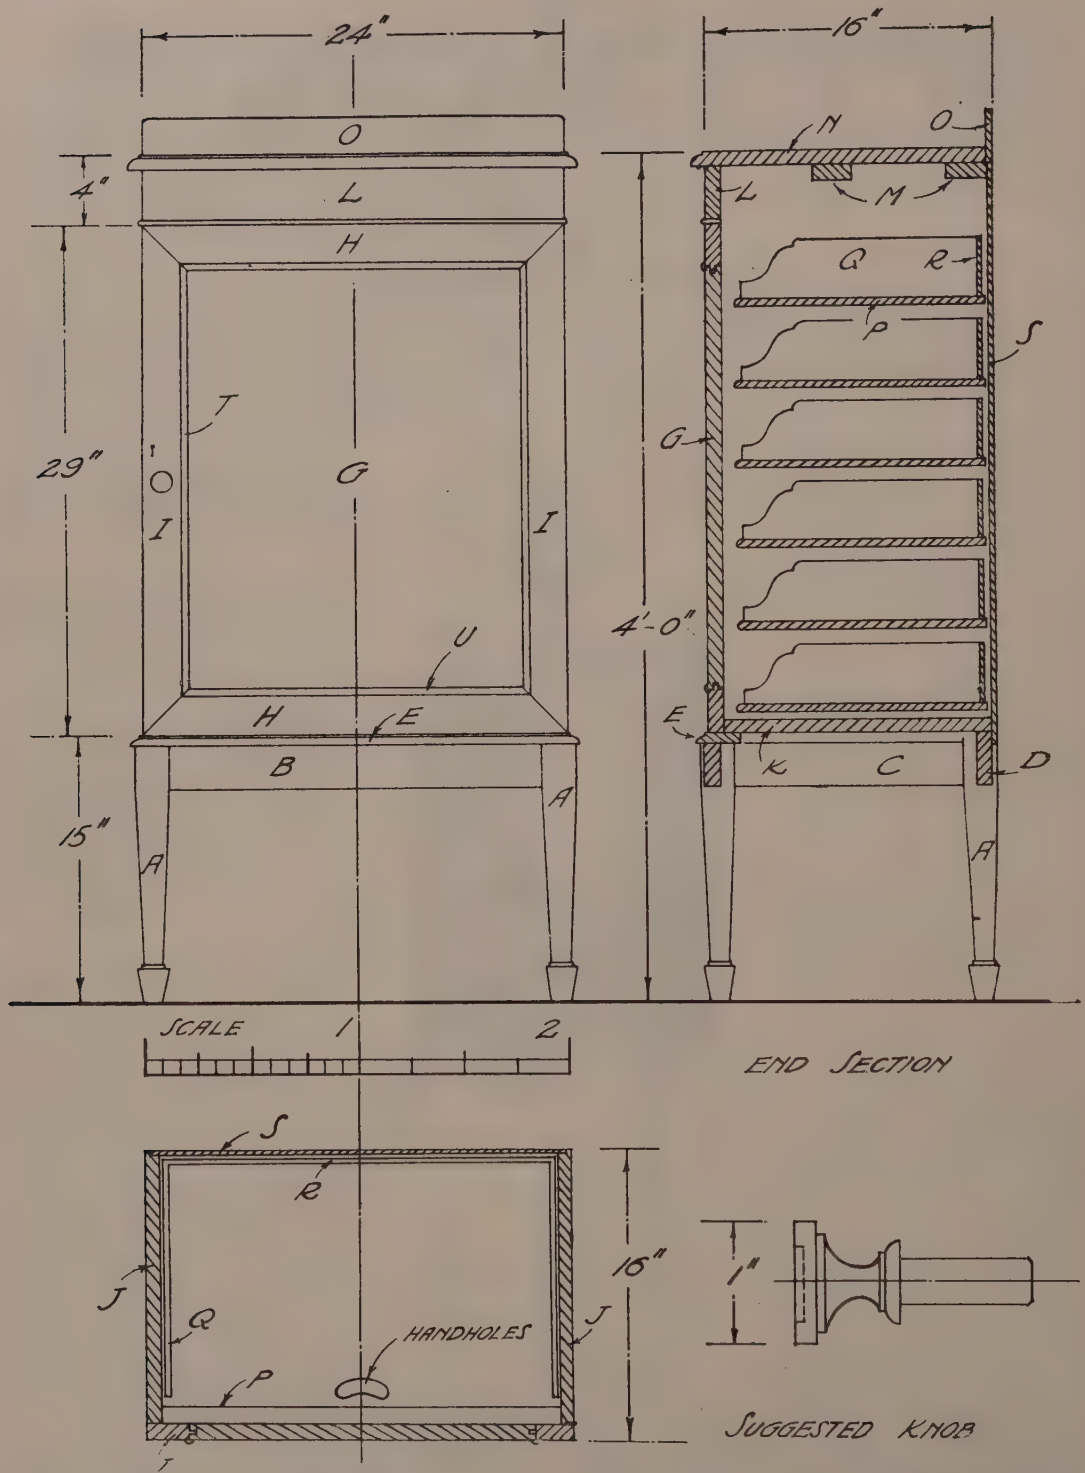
FRONT ELEVATION, END SECTION, SECTIONAL PLAN, WITH SCALE.
